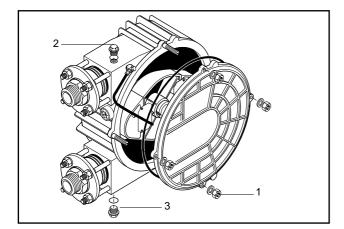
1 Cover fastening nuts 2 Oil filler bore with plug
